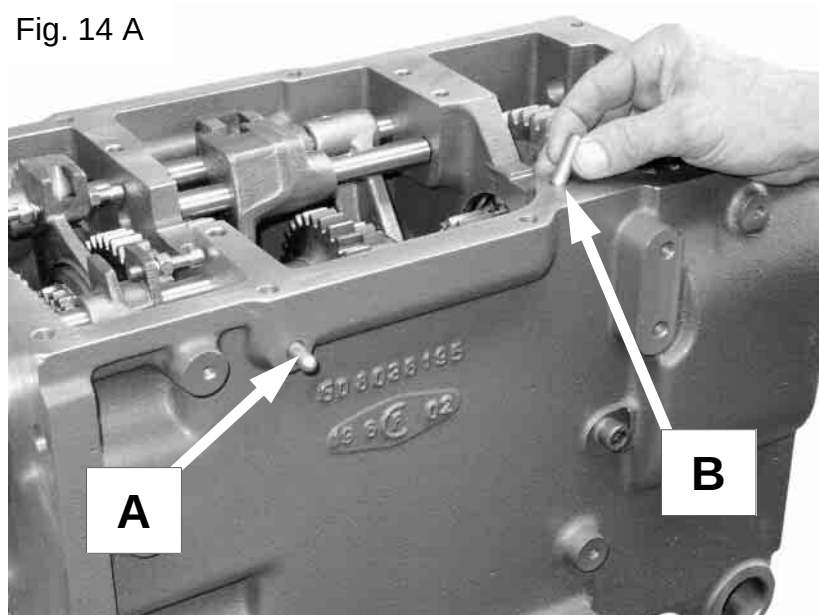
A illustrates the other retainers to install in the gearbox during the assembly phase.
